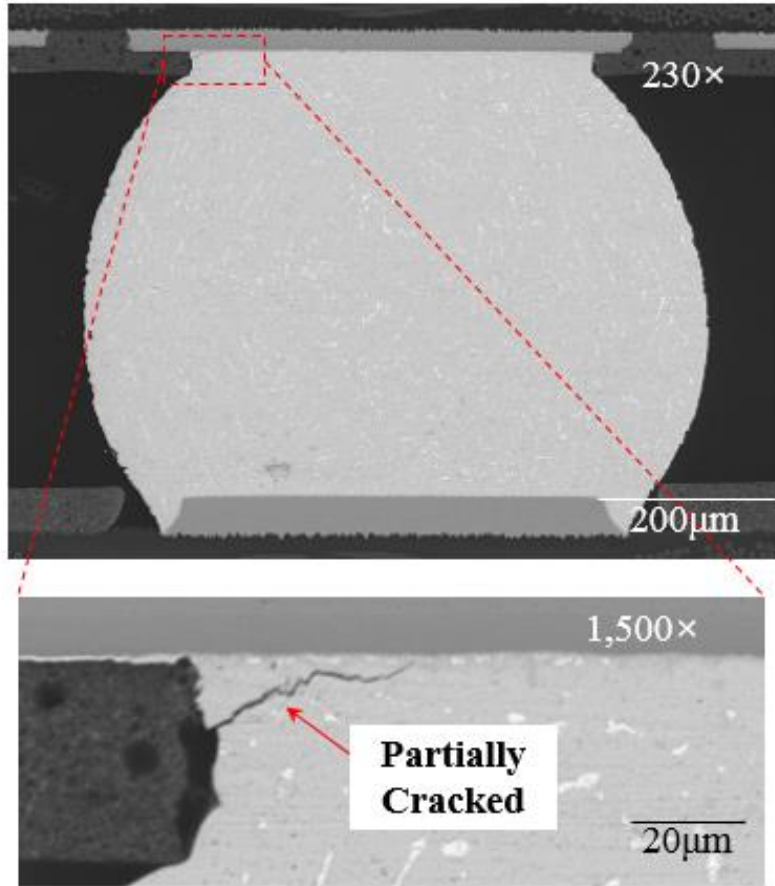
SEM micrographs on solder joint of U2 package of PCB sample #2
